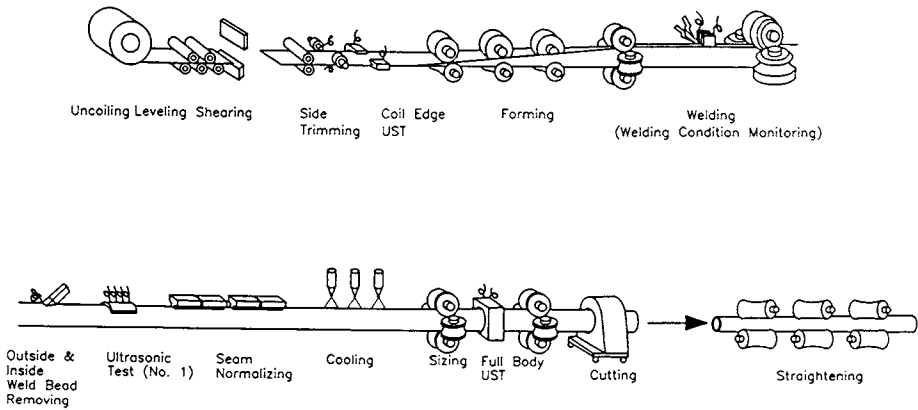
Nippon's Electric Welding Method of manufacturing casing. (Courtesy of Nippon Steel Corporation.)
